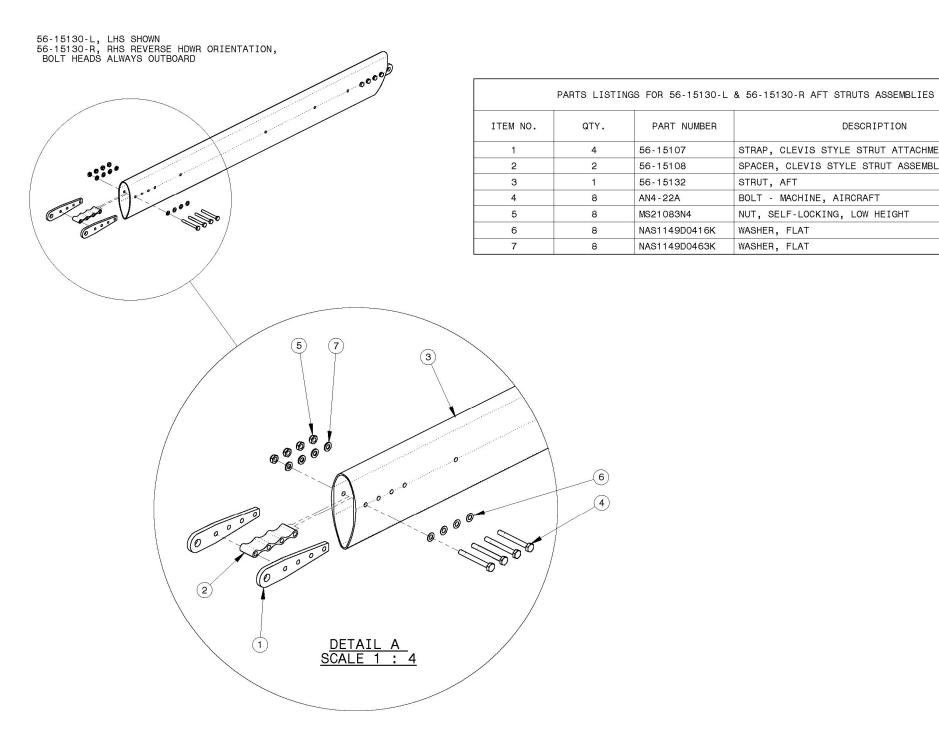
Parts Listings for Aft Struts Assemblies, 56-15130-L and 56-15130-R
